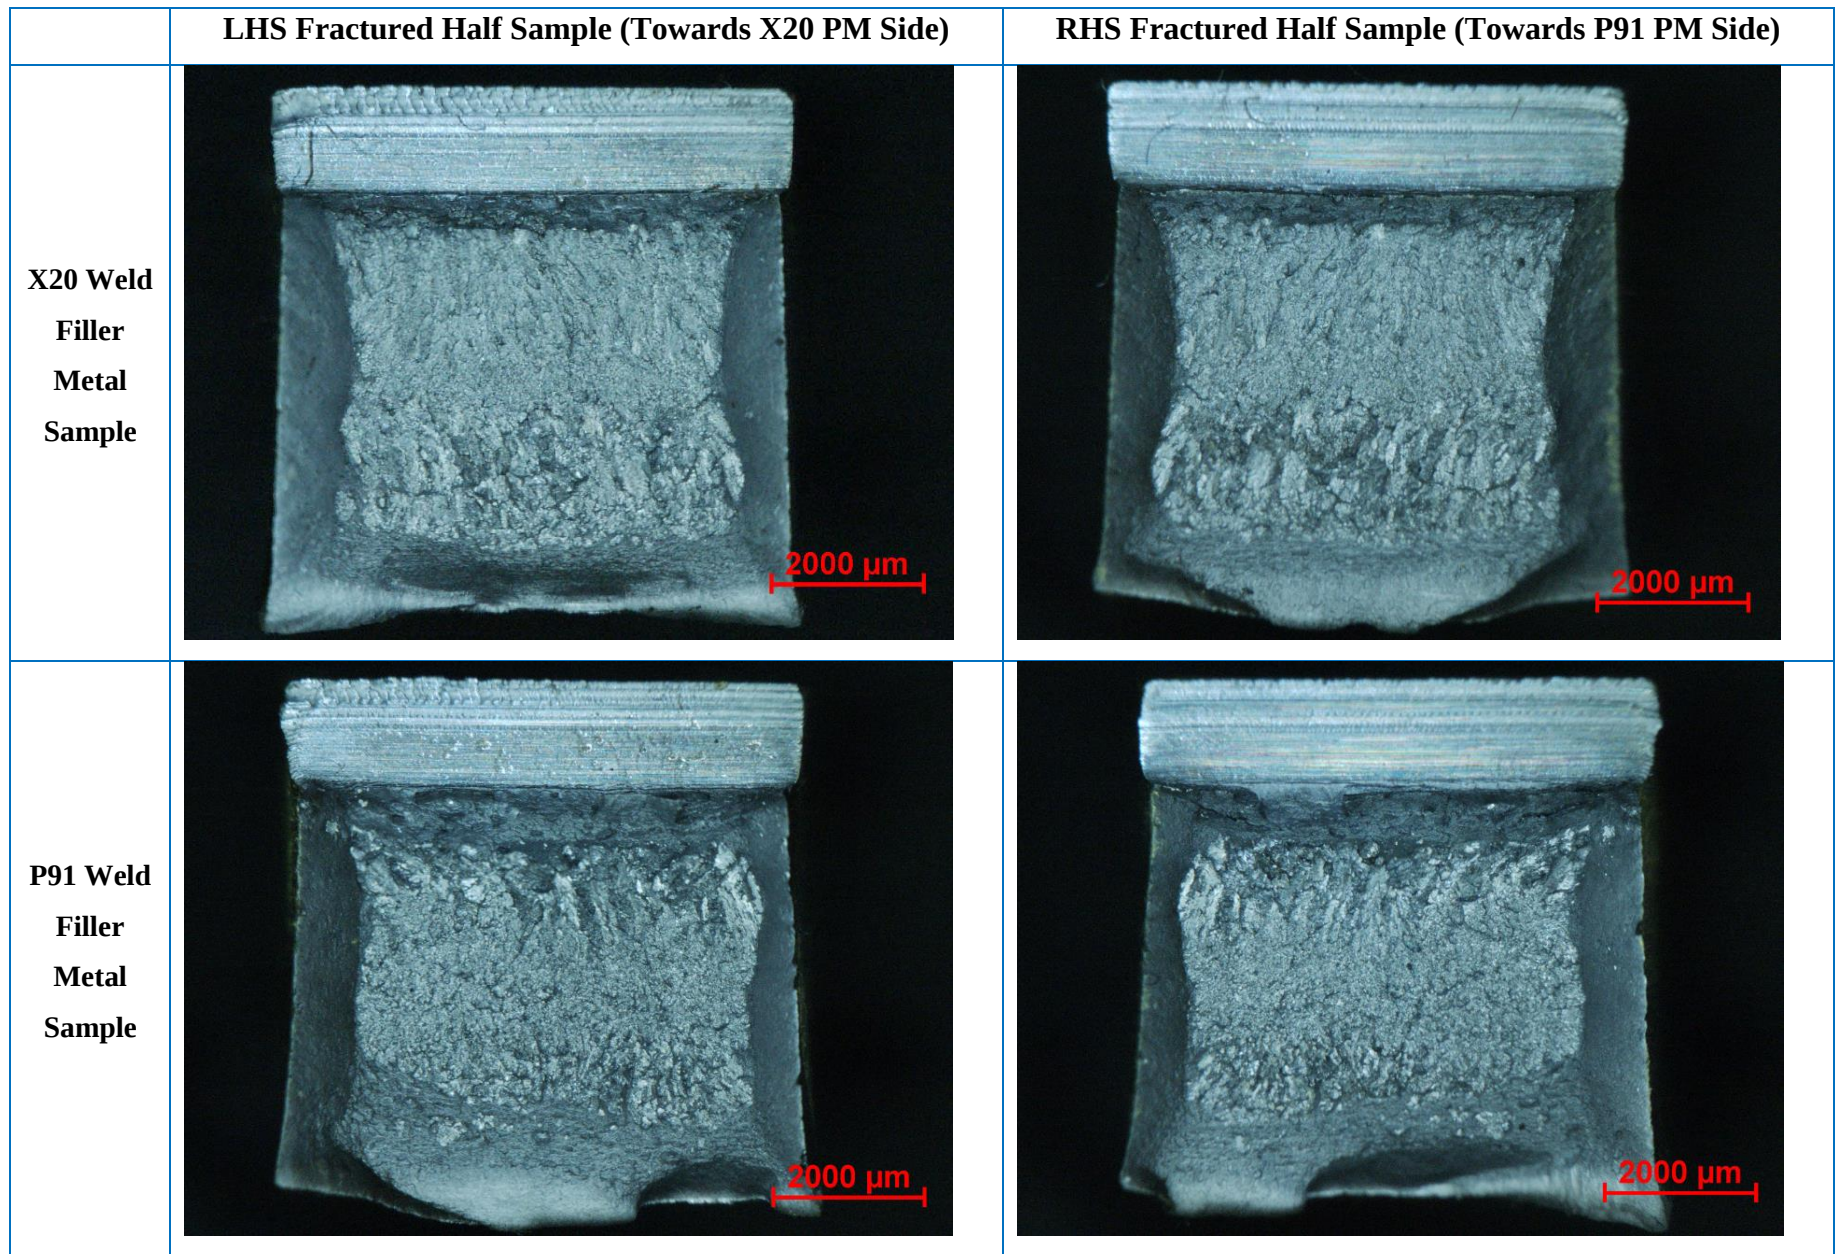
Stereo microscope images of impact fracture surfaces filler metals showing features of ductile fracture; dull grey colour with cup and cone morphology appearances.
